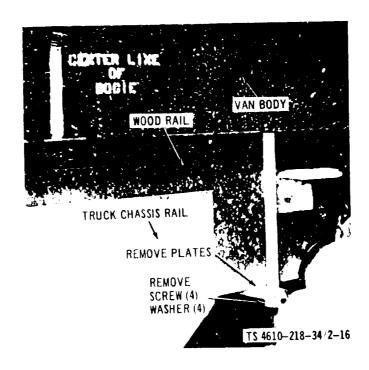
Van Body Mounting, Center, Removal and Installation
